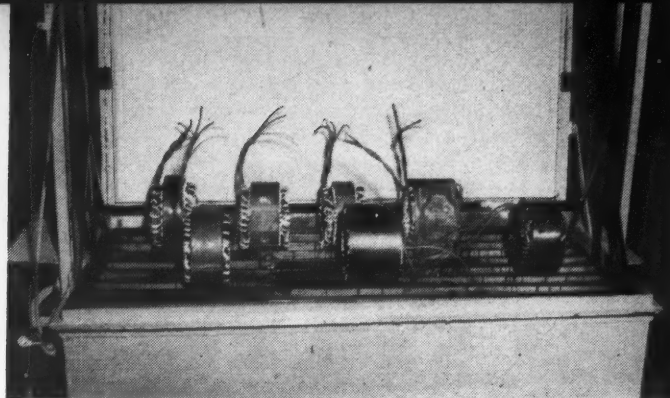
Small stators placed on grilled elevator platform ready for dipping. Lead wires are left sticking up to prevent immersion.
